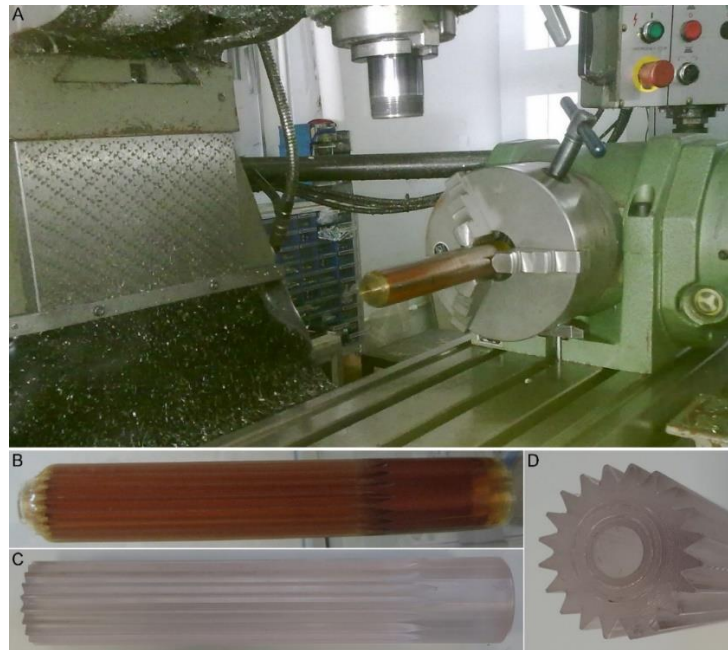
Polymer preform surface modification. (A) Lathe with preform mounted for structuring V-grooves, (B) PEI grooved preform, (C) PC grooved preform, and (D) edge view of PC grooved preform showing V-grooves and hollow core after removing Teflon rod.
